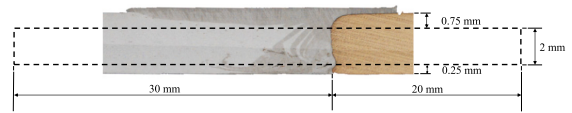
Dimensions of resistance measurement test specimen with reference to weld cross-section showing the 3 mm plate thickness was reduced to 2 mm.
